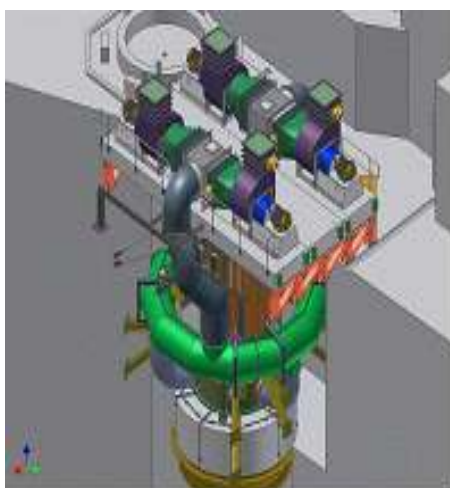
Westinghouse 3 loops Rx vessel head assembly before SHA
